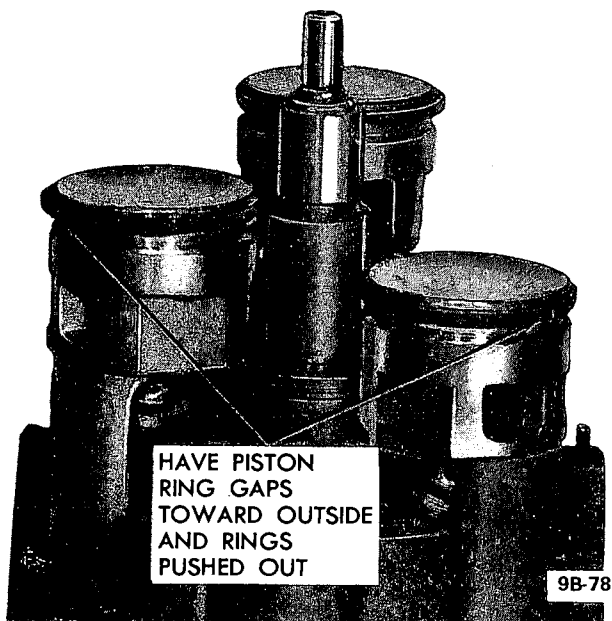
B-105 Pistons Positioned in Stair-Step Arrangement - 6 Cylinder Compressor
